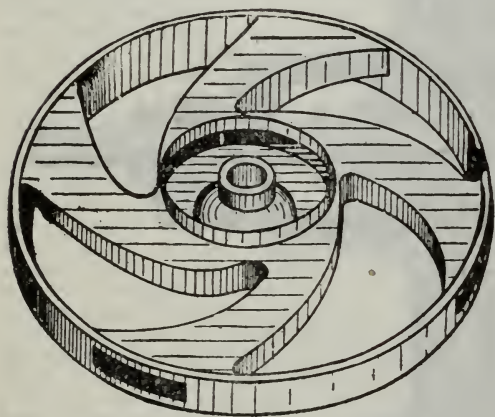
,303 and 4,304.—Gwynne's conoidal type centrifugal pump and detail of impeller. The arrows indicate the direction in which the impeller turns. In construction. A, is the inlet; B, discharge; C, the bottom chamber within which the impeller consisting of disc K, and blades or vanes 1 to 8, revolve closely without touching the surrounding casing. To chamber C, are attached the conducting case D and D', which form between them an easy curved spiral discharge passage, gradually enlarging toward its outlet B. The shaft G, passes through the stuffing box F, thence through and into the sleeve R, which is securely bolted by wide flanges to the case D', thus forming a central rigid and long bearing for the spindle. The driving pulley P, has its bearing babbitted and runs on the outer diameter of the sleeve R. S is the driving clutch secured to spindle by the feather key and set screw S', and engages by the lugs to the driving pulley. Means of lubrication is afforded by the oil holes *r*. The vanes on disc K, extend above the disc to exclude dirt from the bearings, and partially relieve the downward pressure upon the disc. The spaces above and below the disc are connected by the holes *kk* through the disc, equalizing the vacuum therein, relieving it from downward pressure, and balancing it so that no lower bearing is required.
